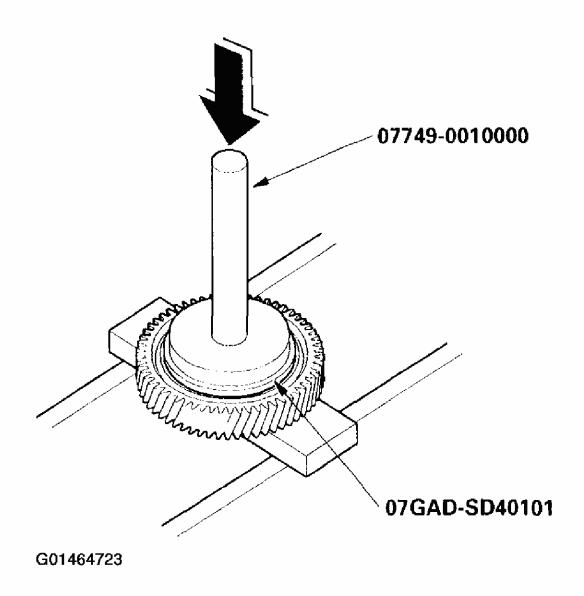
Installing The Bearing On The Secondary Shaft Idler Gear Courtesy of AMERICAN HONDA MOTOR CO., INC.
